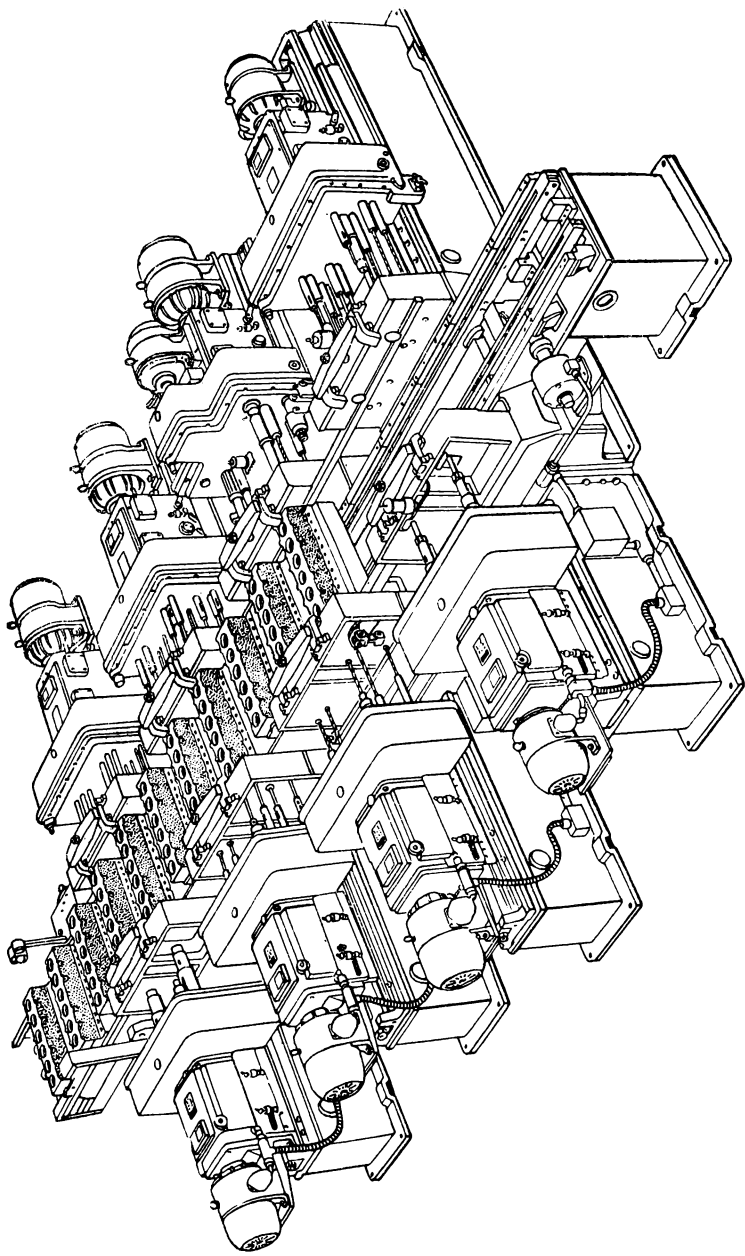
Automatic transfer machine built up of horizontal-spindle drilling units
